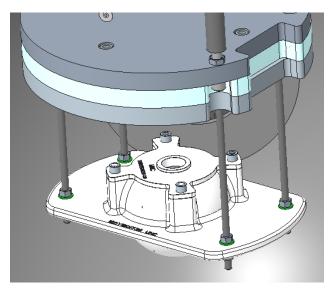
HE Support and Hanger assembly drawing number 180Y1801736.
